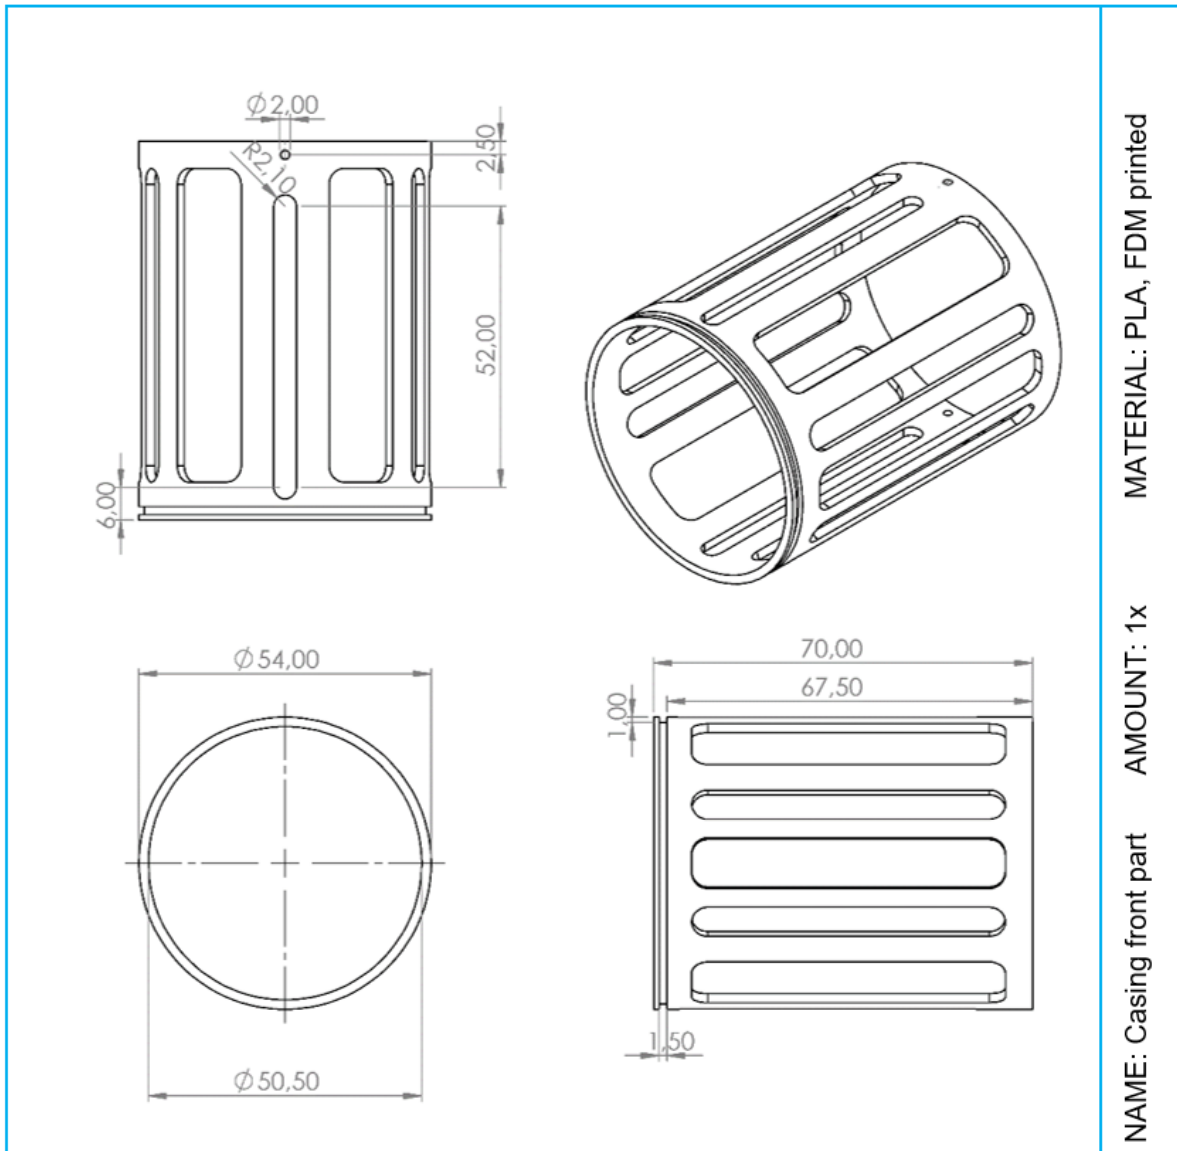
Construction drawings of the casing front part - 3D Printed prototype
